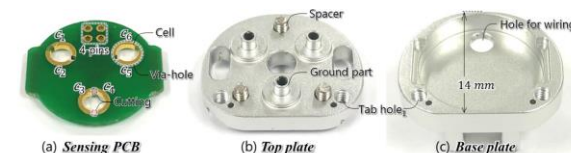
Manufactured assembly parts of the sensor. (a) Sensing PCB. (b) Top plate. (c) Base plate.
